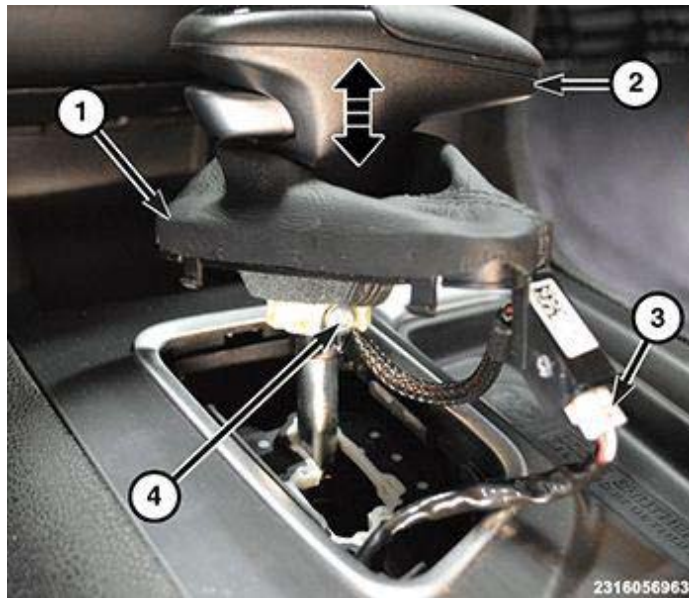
Shifter Bezel, Knob, Connector & Screw
